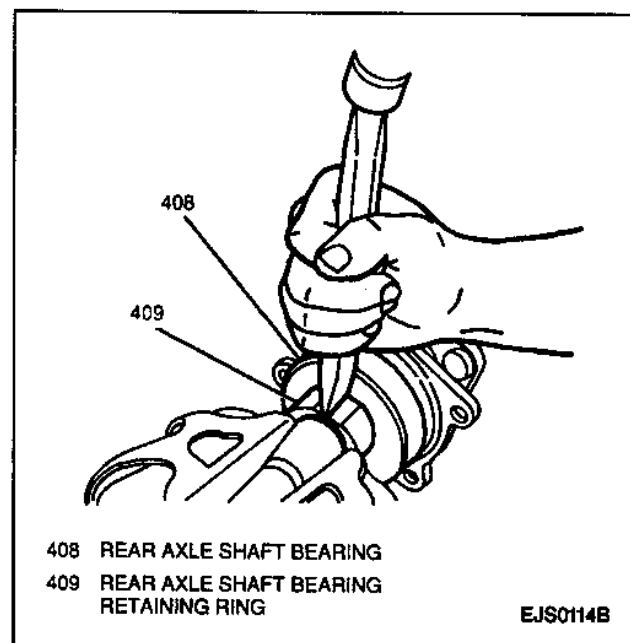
Removing Rear Axle Shaft Bearing Retainer Ring
